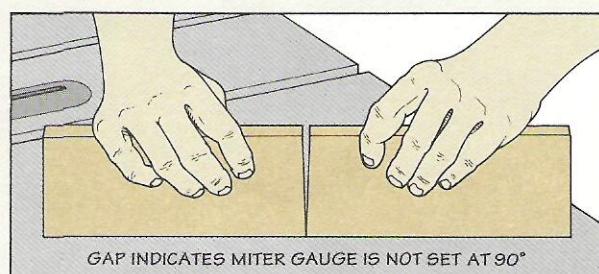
To check that your miter gauge is 90° to the blade, crosscut a piece of scrap. Flip one piece over and butt the cut ends together. If there's a gap the miter gauge needs to be adjusted.
